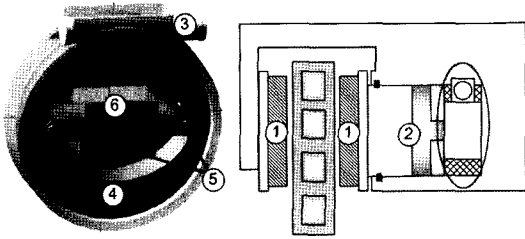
The EMB caliper with ellipse cam drive¹¹⁾
